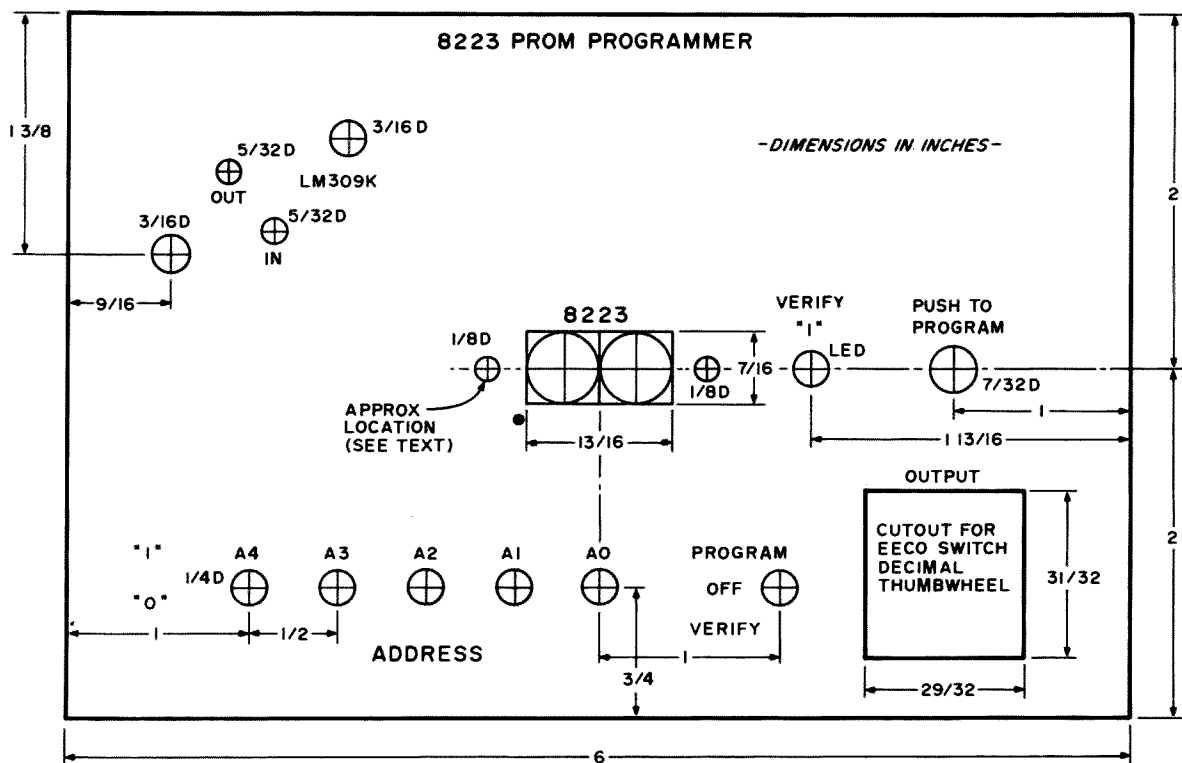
Parts layout of top panel (full size) with suggested labeling. Hole for LED should ensure tight press-fit.
